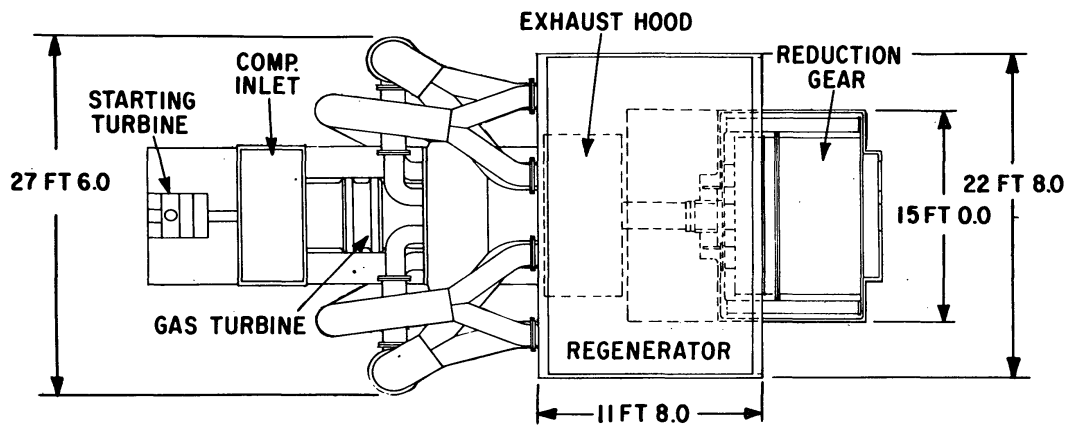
Plan - Gas Turbine, Regenerator and Reduction Gear.
